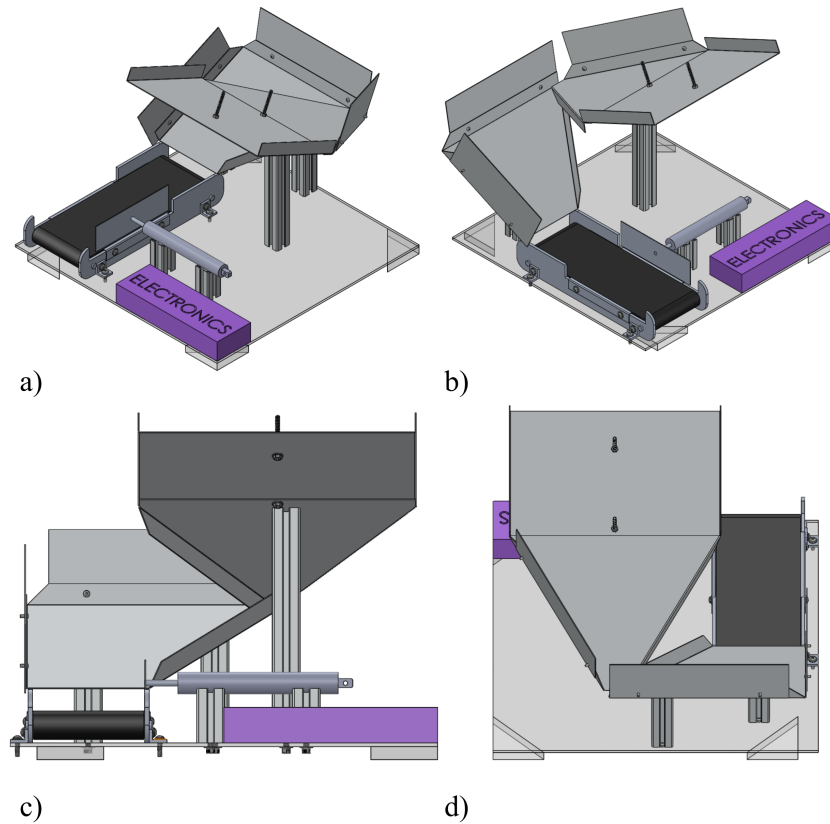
3D CAD model of the final physical prototype. a) Front isometric view of the model. b) Back isometric view of the model. c) Front view of the model. The electronic components will be organized on one edge which is indicated with a purple box. d) Top view of the model.
